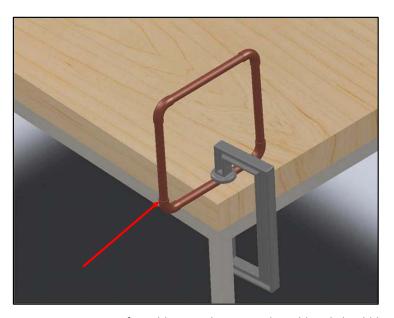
Setting up for soldering- The joint to be soldered should be in the position as shown in the figure.
